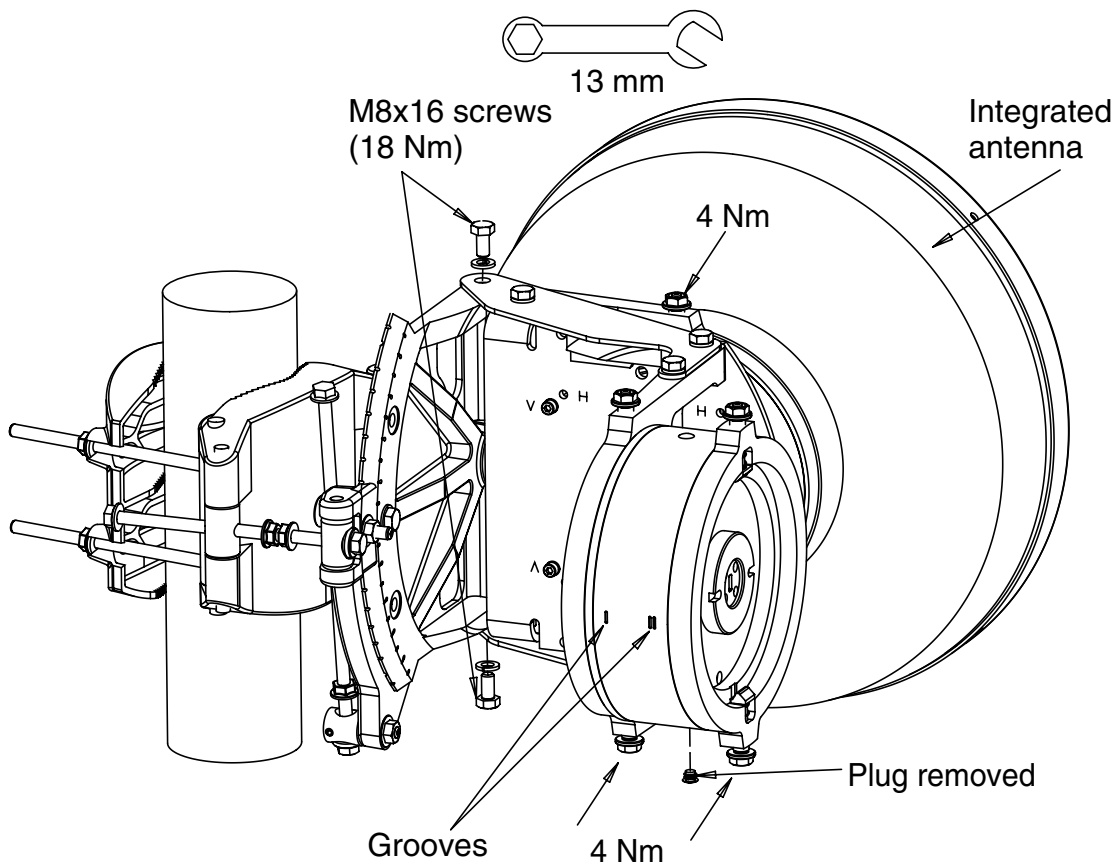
Mounting the 18 - 38 GHz coupler on the alignment unit
